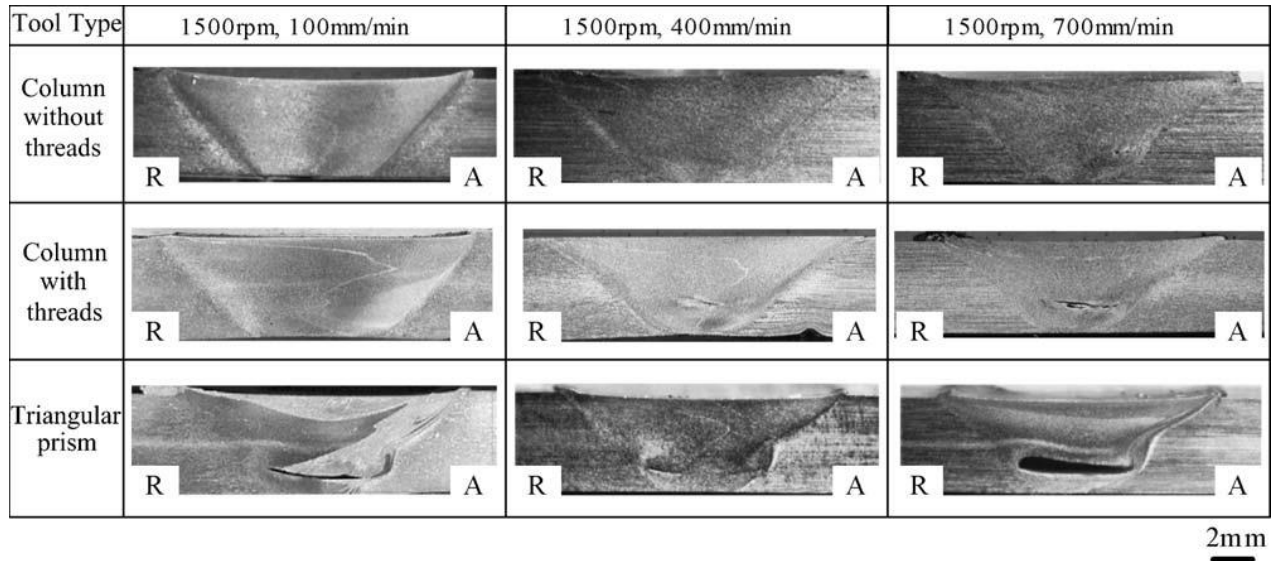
Macrostructure of a cross section of AA1050-H24 FSW joints. ([Fujii et al., 2006](#))
